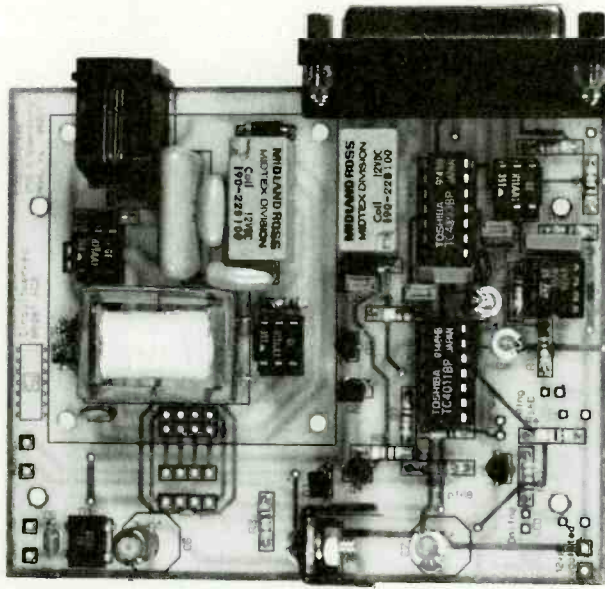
AN ASSEMBLED, type-approved autocoupler board. You can purchase an assembled one from the source in the Parts List.
